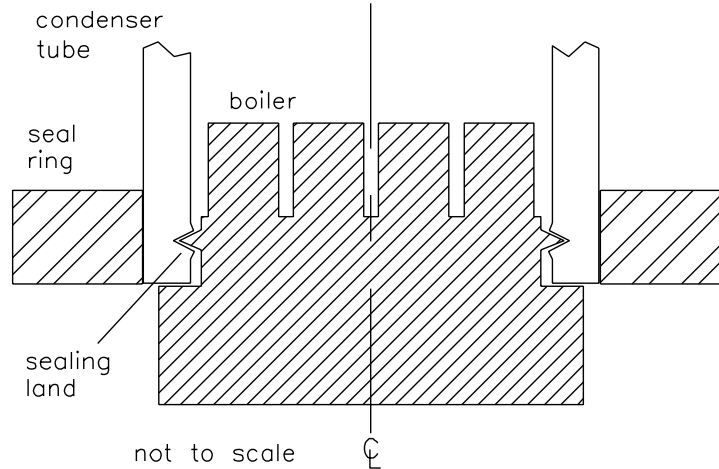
Section view of the condenser tube sealed on the boiler by the shape memory ring. The land feature is 0.3 mm high.
